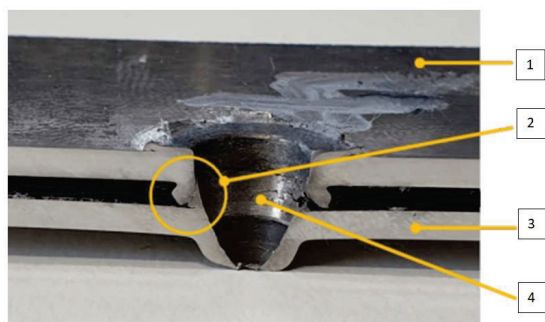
Materials joined by the Flowdrill method: 1- sheet metal, 2- joint, 3- sheet metal, 4- bushing [17].
